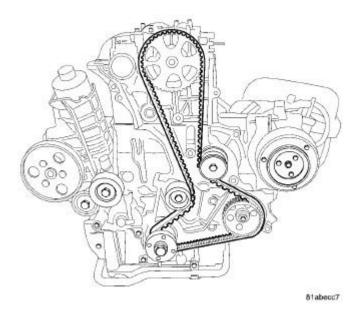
TIMING BELT Courtesy of CHRYSLER LLC
